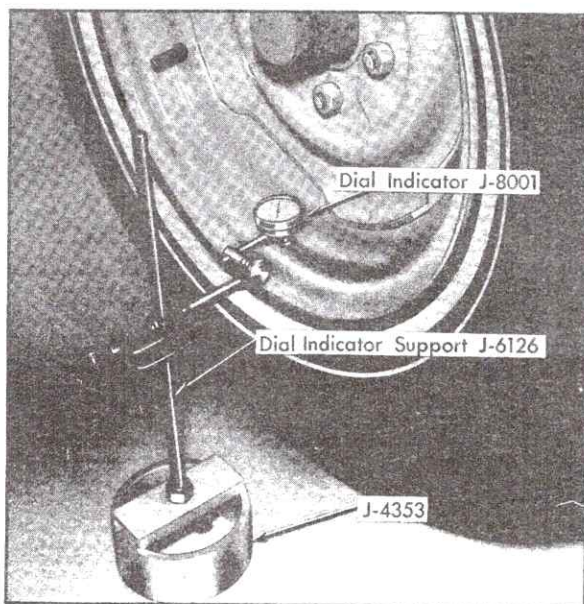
Checking Radial Runout At Bead Seat (Except 693)
